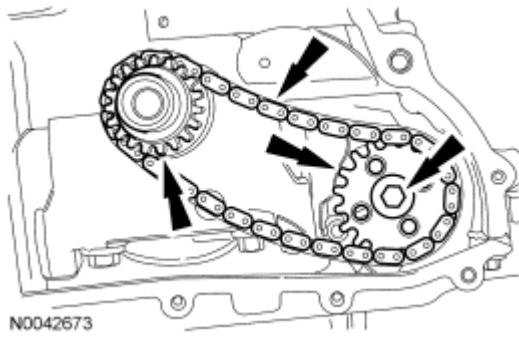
Locating Shoulder Bolts & Tensioner
